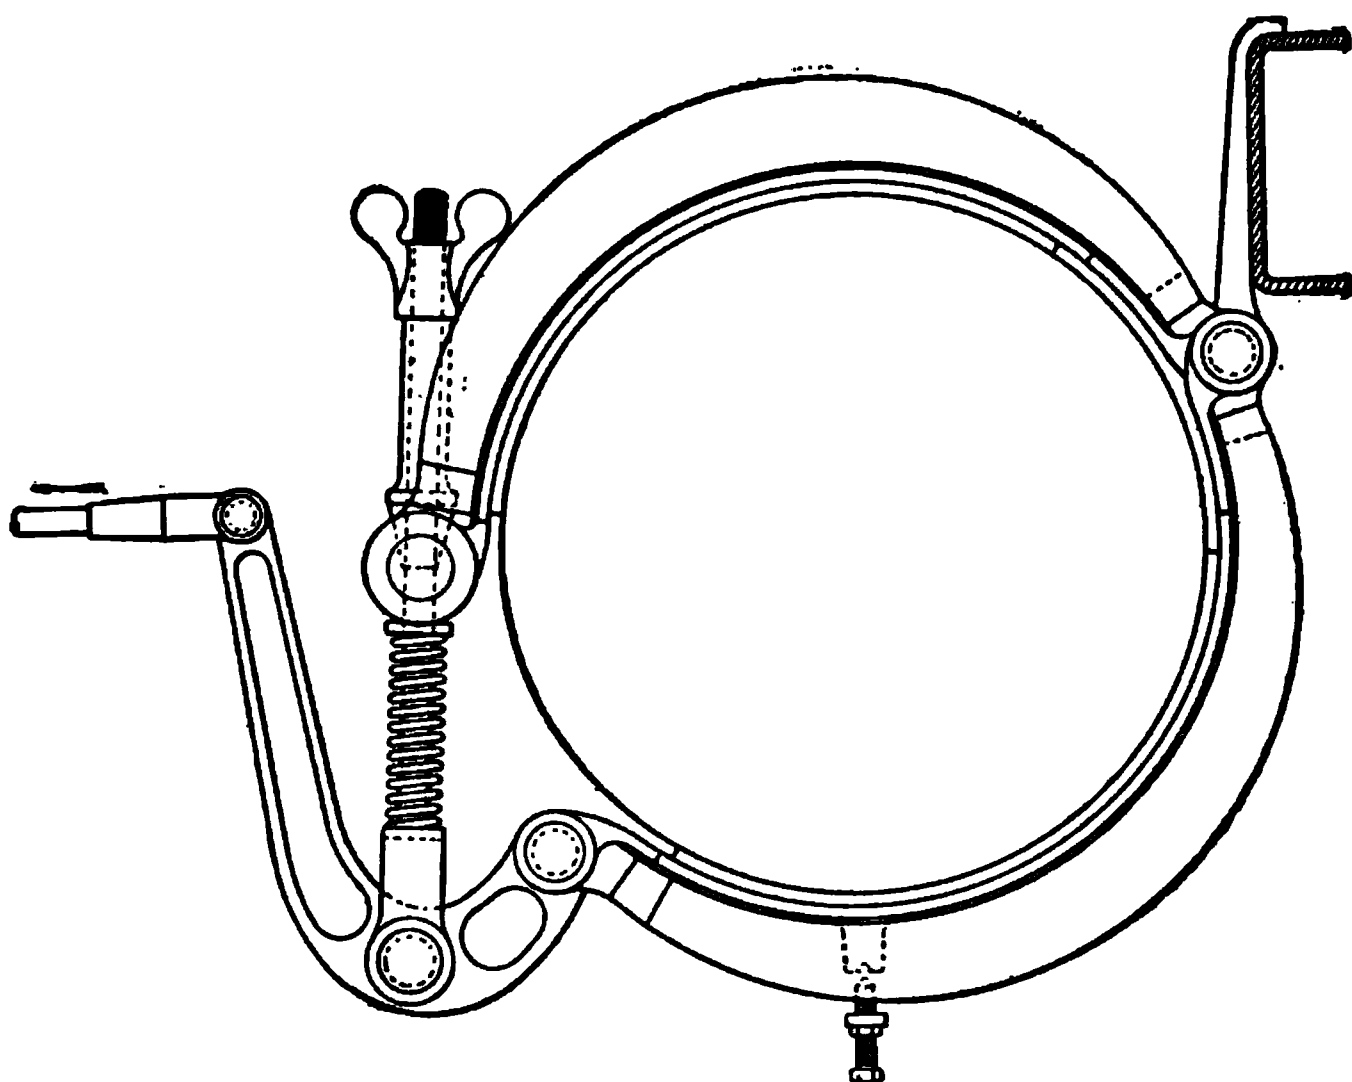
Benz Countershaft Brakes for Chain-Driven Car
